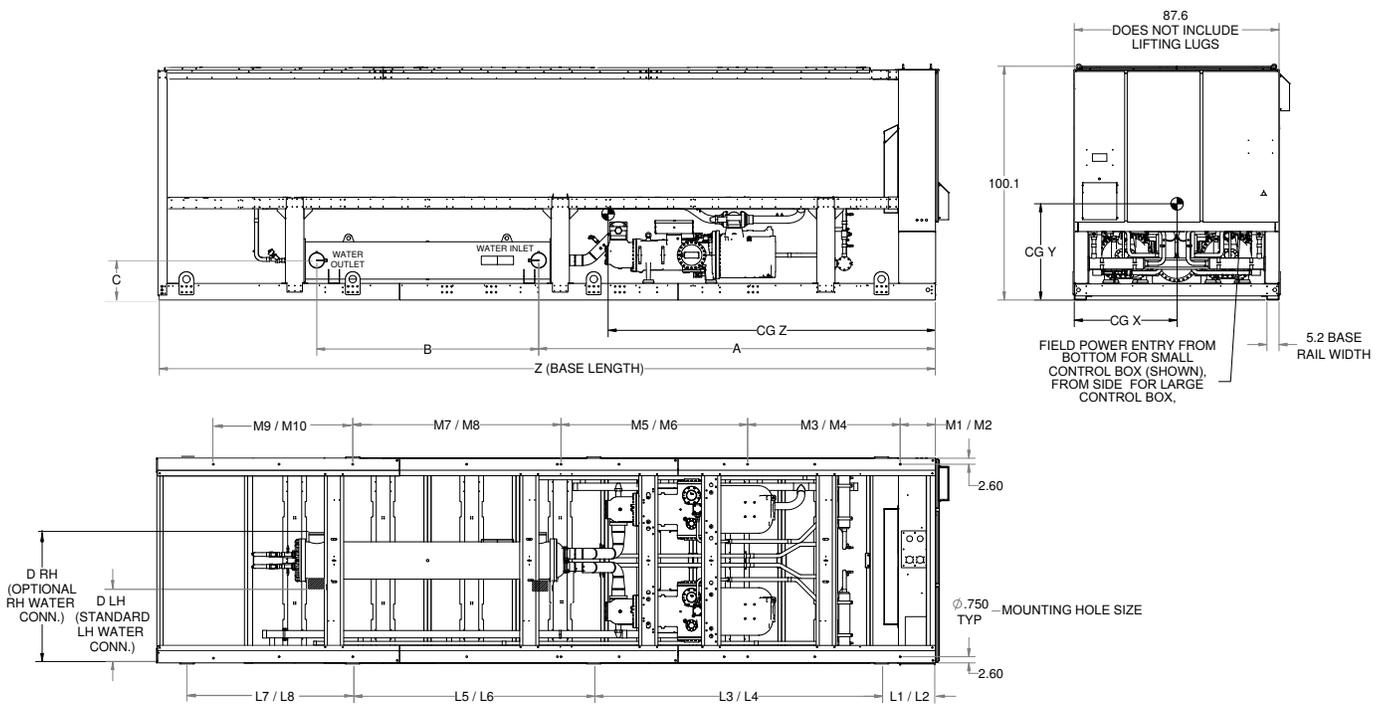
Reference Dimensional Drawing - 16 Fan - 30 Fan Configurations with Shell and Tube Evaporator
